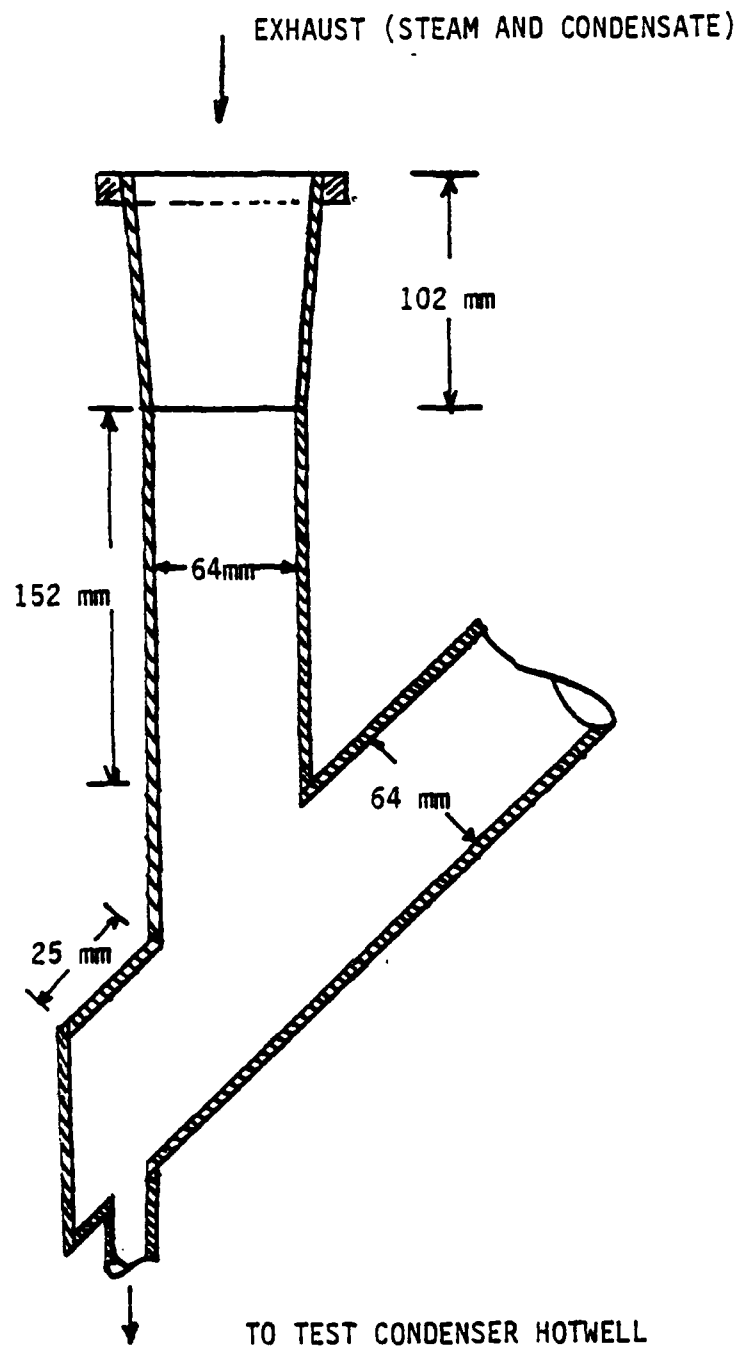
Details of Exhaust and Condensate Piping from Exhaust Plenum
